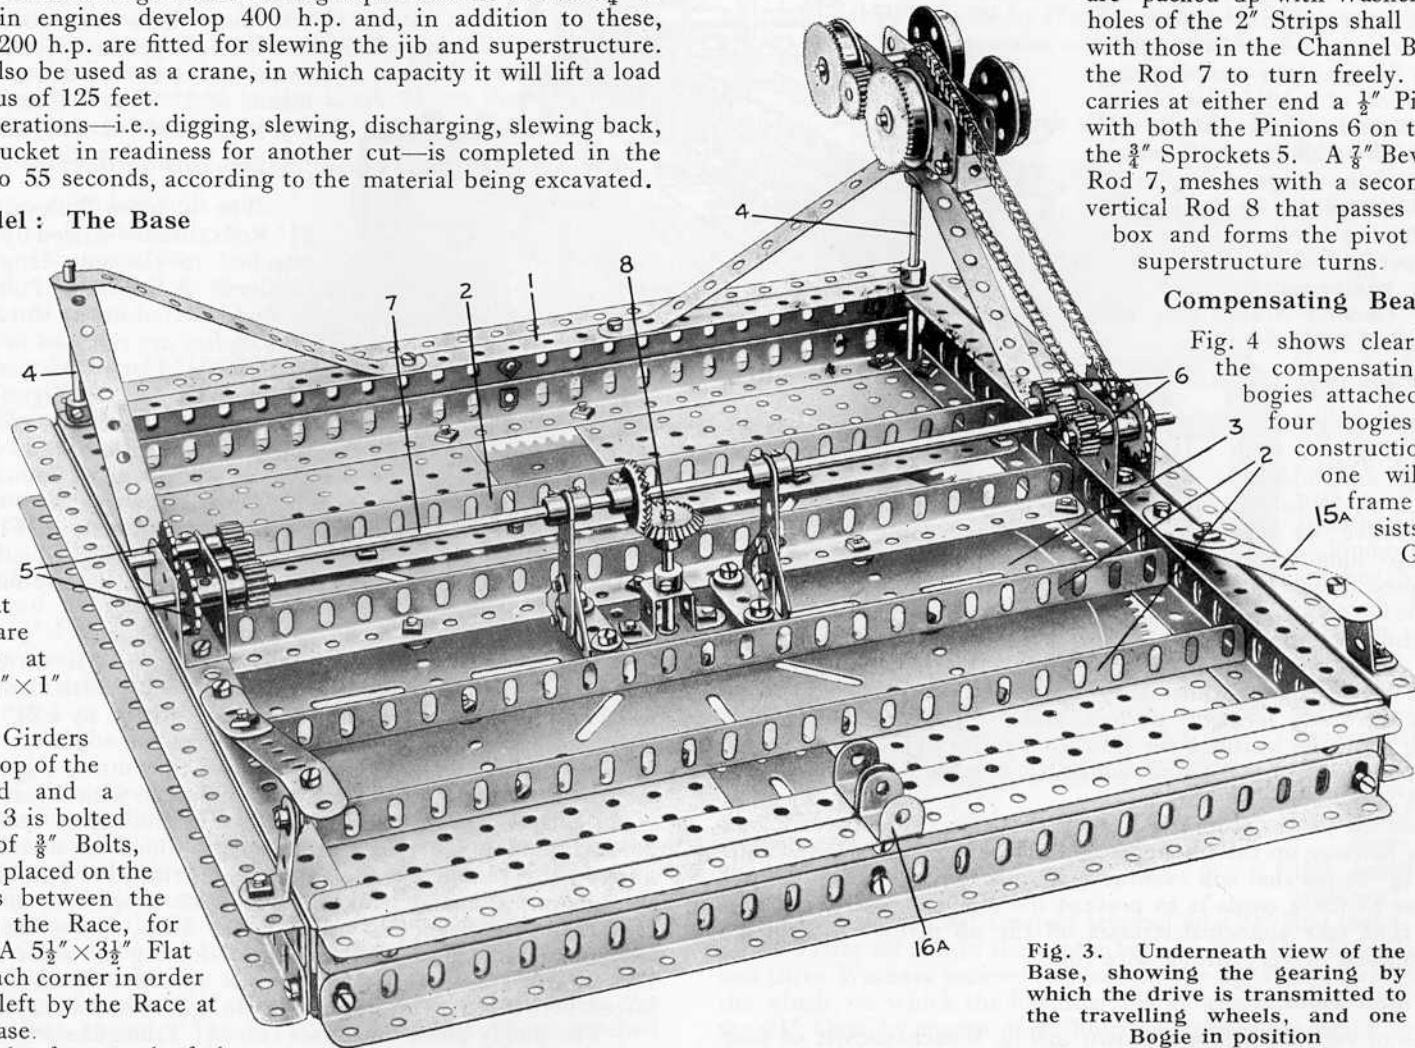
Underneath view of the Base, showing the gearing by which the drive is transmitted to the travelling wheels, and one Bogie in position
